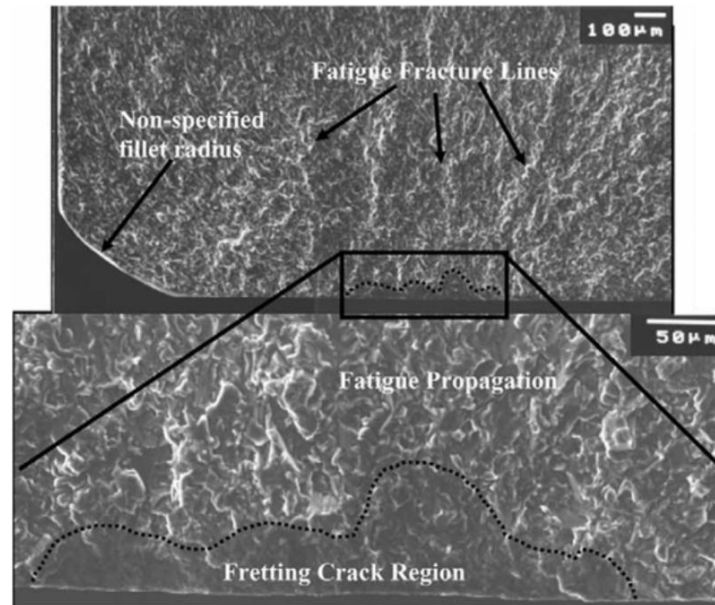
Fracture surface showing typical fretting cracks, as found by Gracia and Grandt [72].
